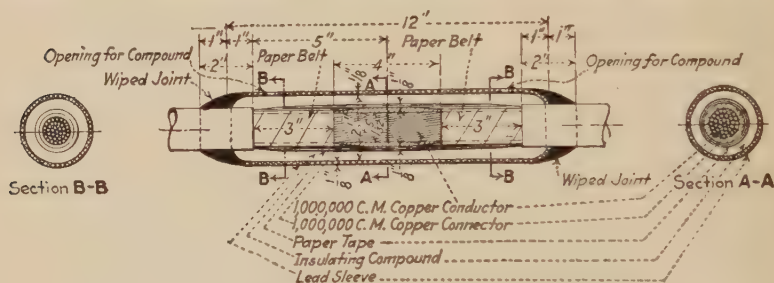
Drawing of 1,000,000 cir. mil cable splice.
